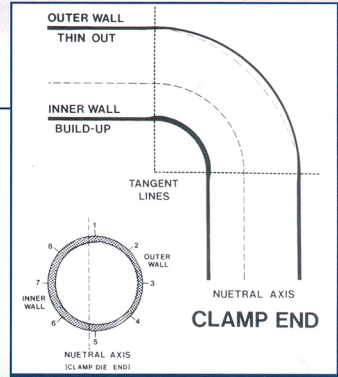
Cross-section illustration of bent tube, showing compression of inner wall and stretching of outer wall.
